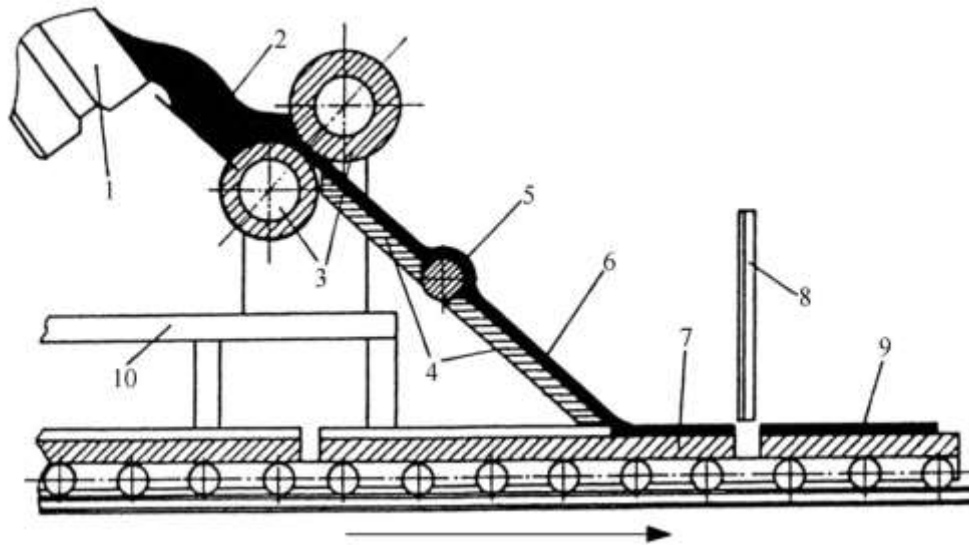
Continuous glass casting using the Bicheroux method: 1 - pot (with a volume of about 1,500 kg of glass melt), 2 - glass melt, 3 - forming rollers, 4 - water-cooled shoot, 5 - auxiliary roller, 6 - formed bolster, 7 - transport table, 8 - shears, 9 - cut sheet, 10 - work platform
